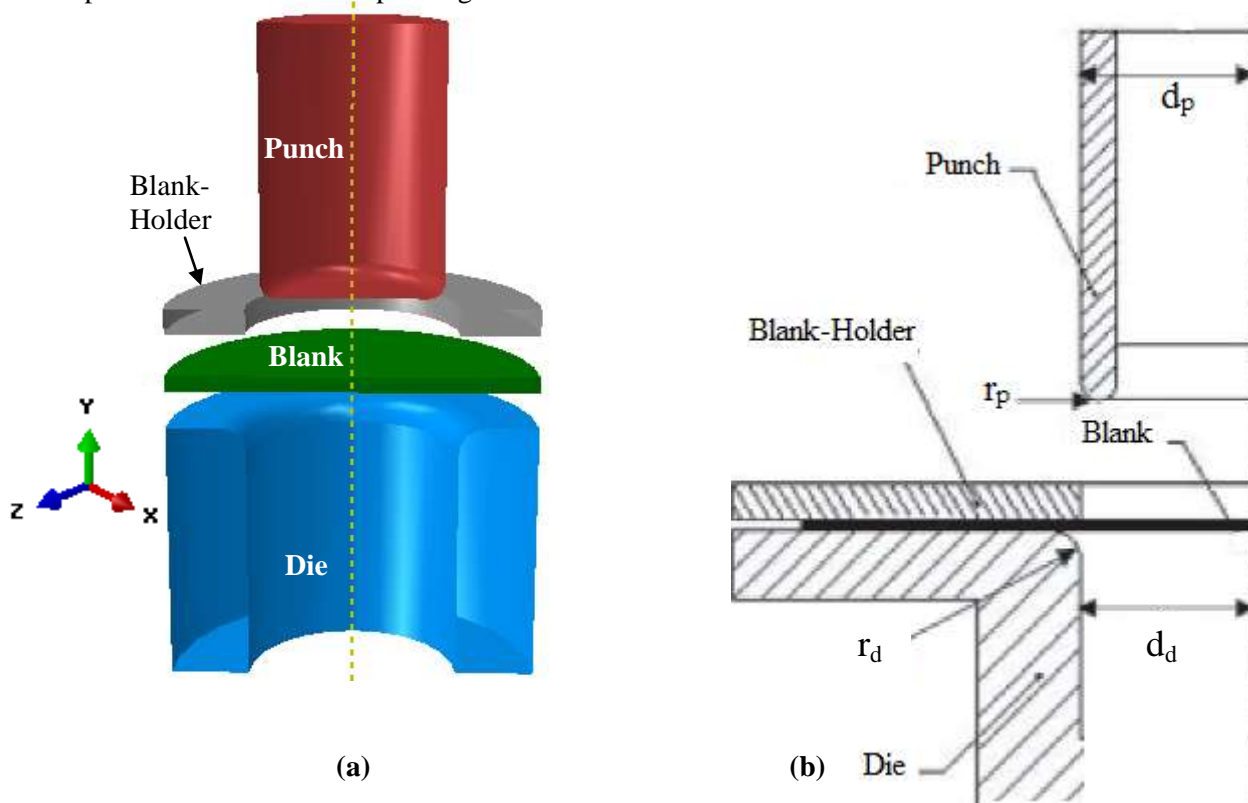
(a) 3D illustration of the deep drawing process and (b) The geometry of the deep drawing device.
